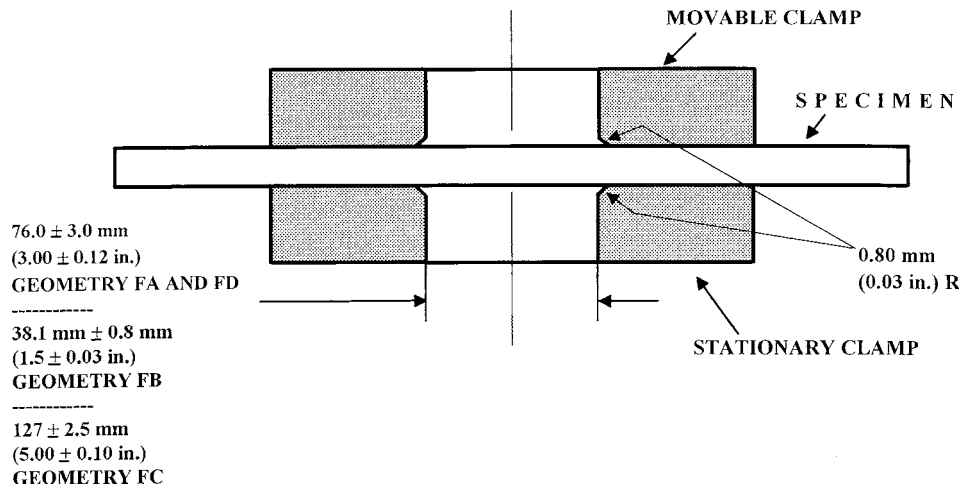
Support Plate/Specimen/Clamp Configuration for Geometries FA, FB, FC, and FD
